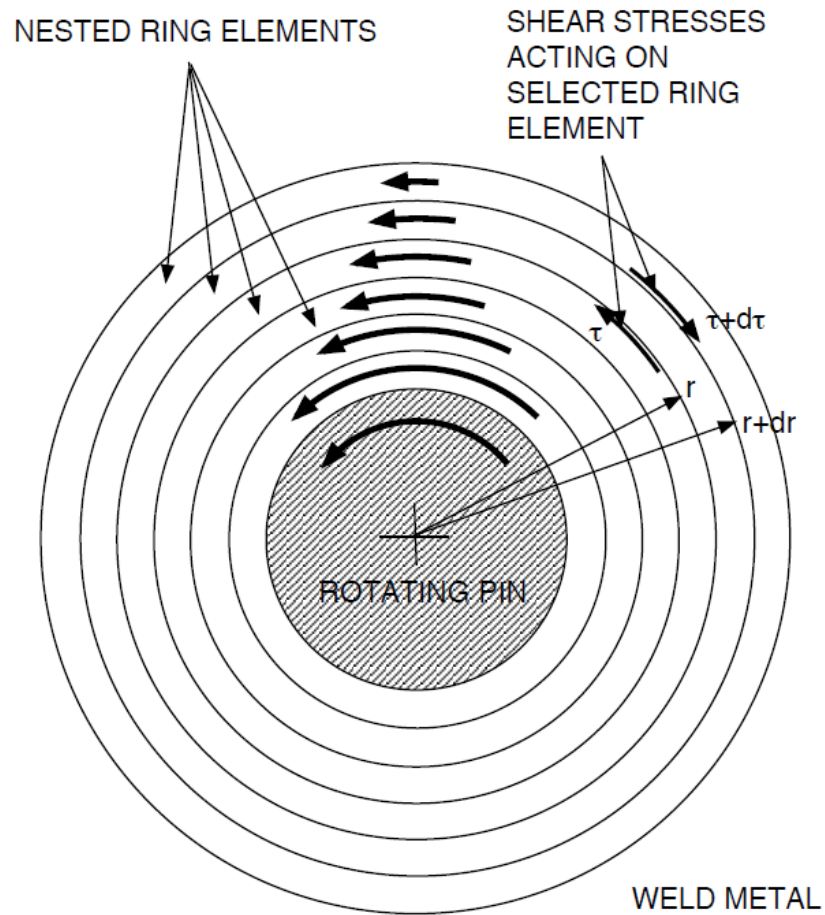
“Nested ring” model of equilibrium flow in friction stir welding. Plan view of workpiece in the x-y plane. The pin tool (represented by the solid circle) is surrounded by a series of nested rings of increasing radii [103].
